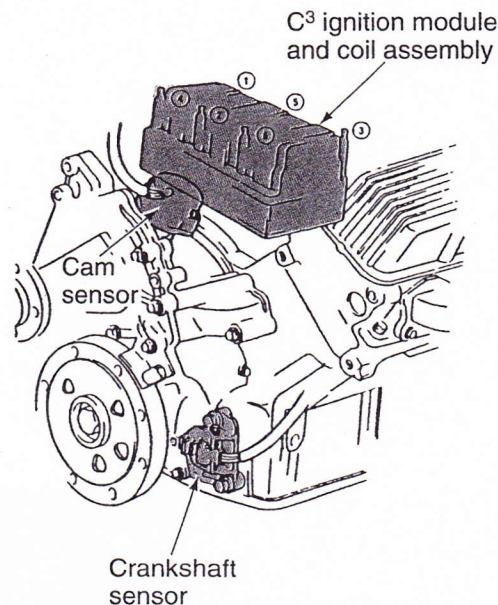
DIS system with a camshaft and crankshaft sensor. Courtesy of Buick Motor Division, General Motors Corporation
